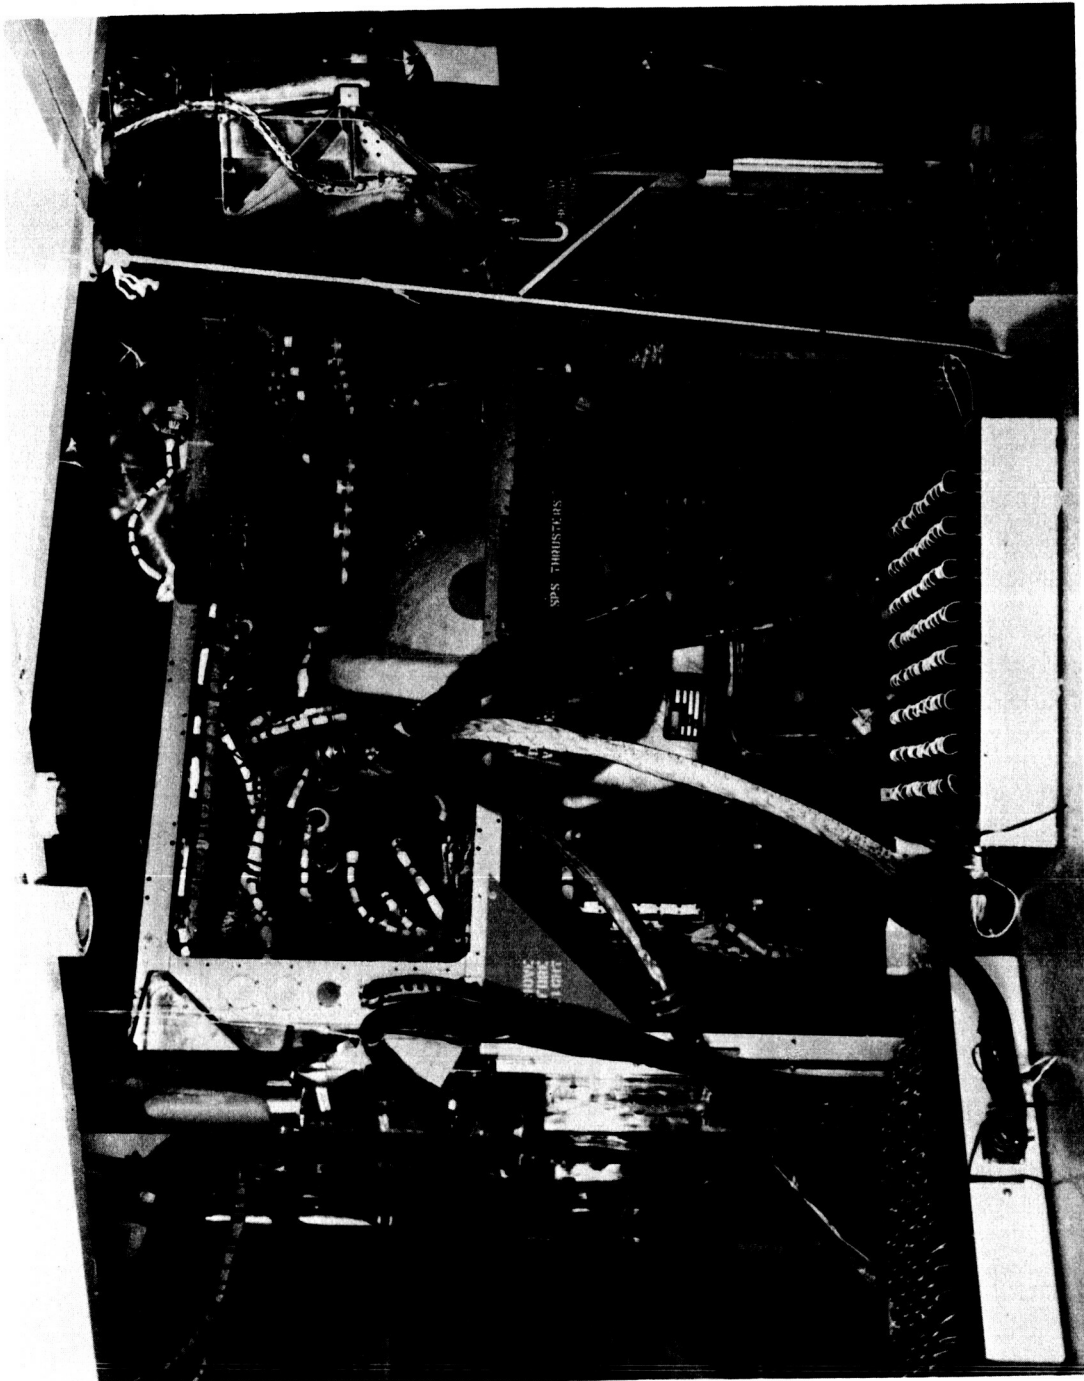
Flight Unit Tank/Feed Assembly Integrated with the EVM
